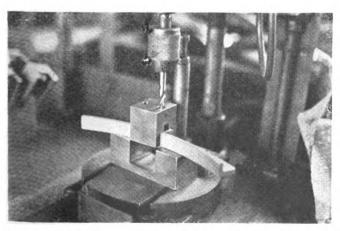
In order to provide the lap joints a short section of the plain ring is cut off and riveted to the L-ring—Here is the drill jig that locates the rivet holes
